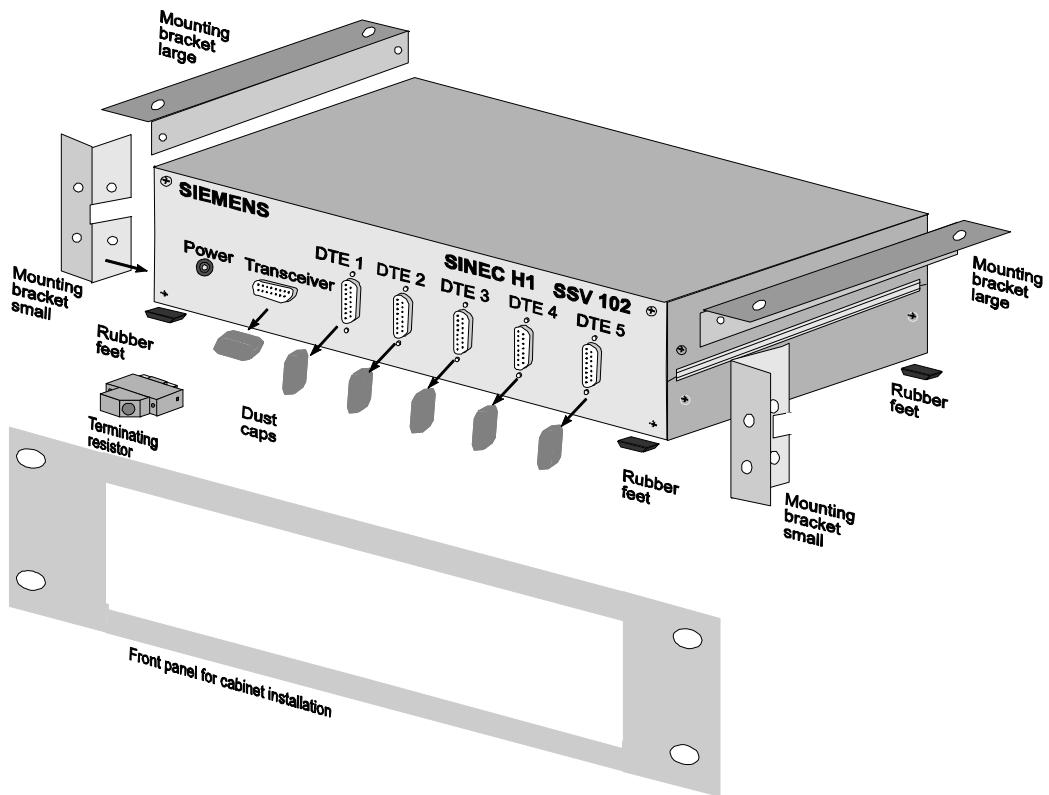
Assembly of the SINEC fan-out unit 102 C
